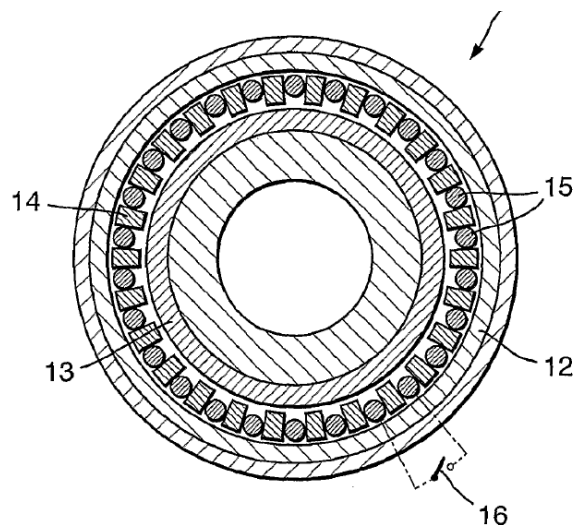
Coaxial Magnetic Gear with Electromagnets to Control Gear Ratios
